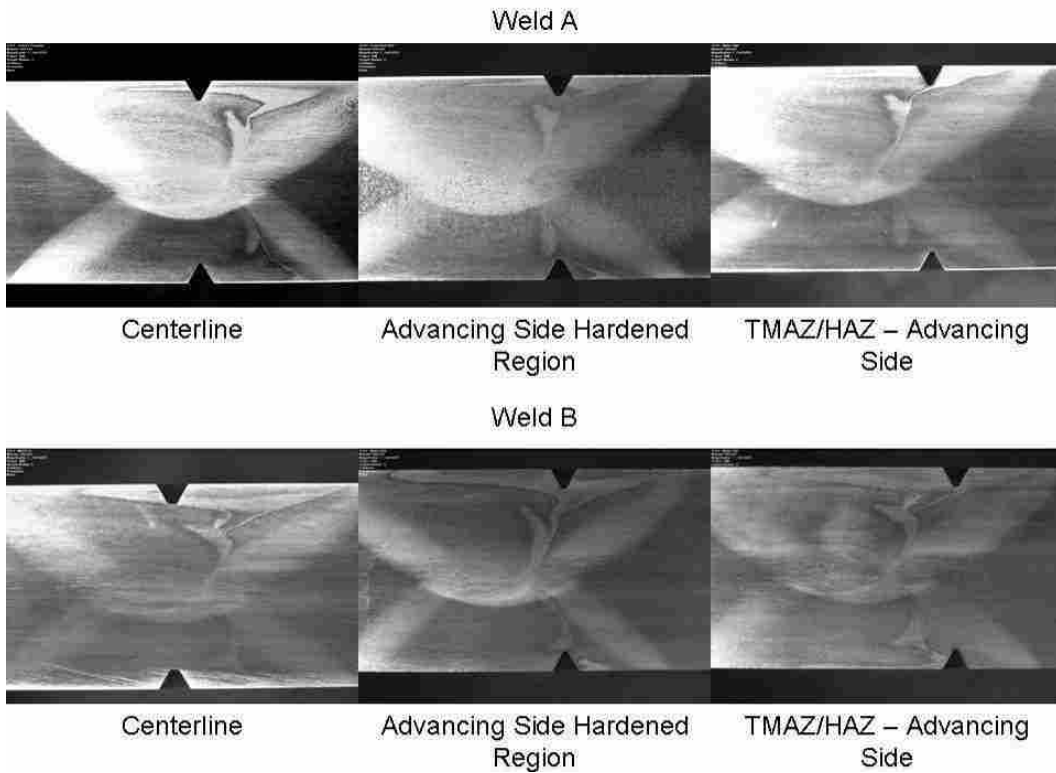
Macrographs of polished and etched back faces of compact tension samples showing crack plane placement for both weld A and B. The crack plane is represented by the area of minimum thickness between side grooves.
